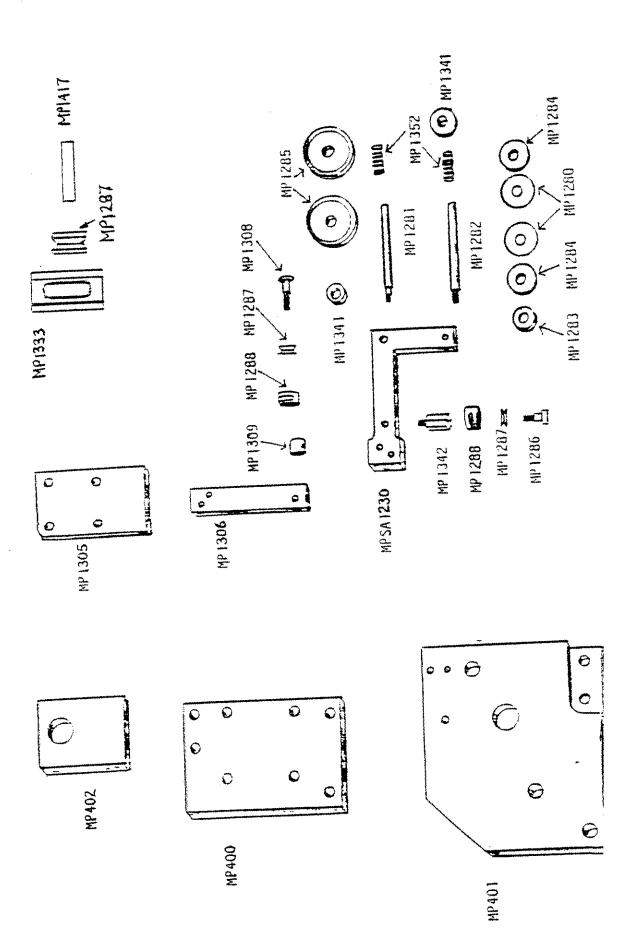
A TAKE DOWN ASSEMBLY FRAME
